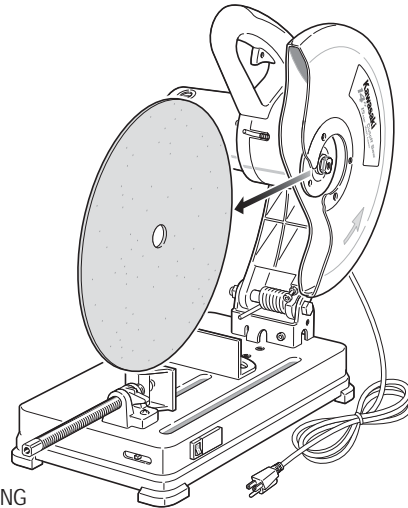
REMOVING/INSTALLING THE CUTTING WHEEL
